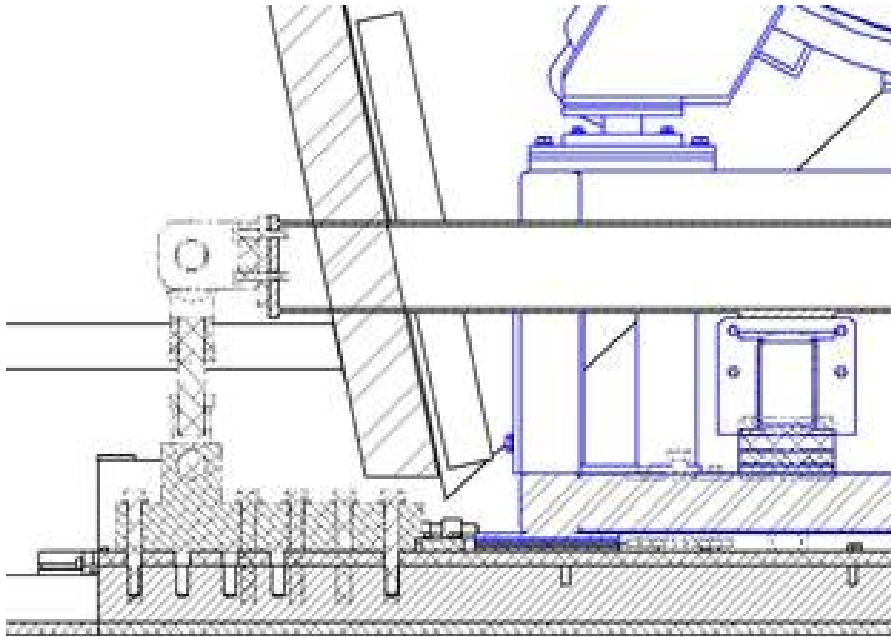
Fig XX: Extended horizontal tie-down bar and repositioned turnbuckle assembly, one half only
